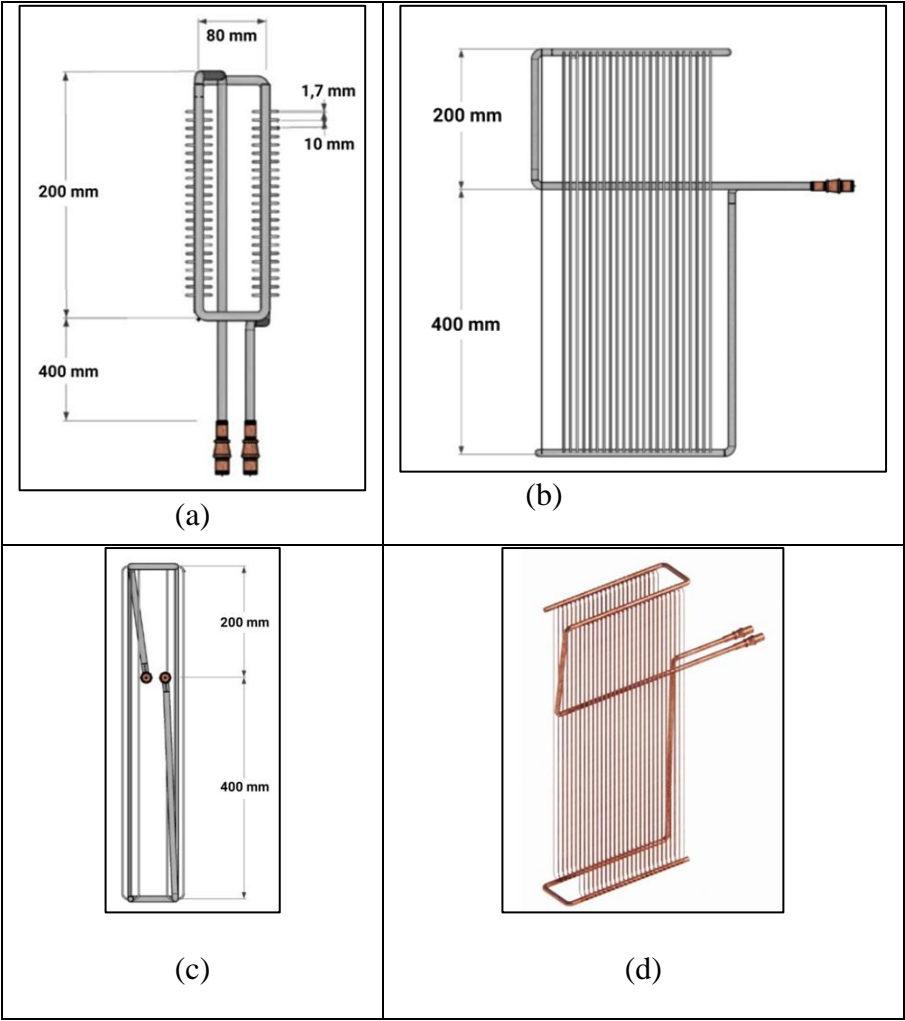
The dimension and the shape of the evaporator. (a) top view, (b) front view, (c) side view and (d) three dimensional view
